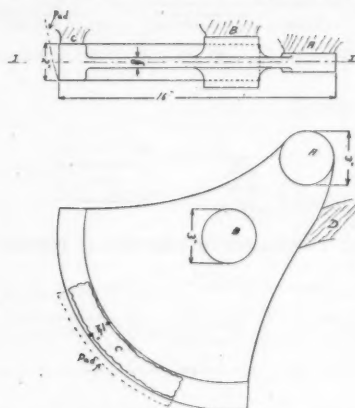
WEIGHT OF CASTING 46 POUNDS
